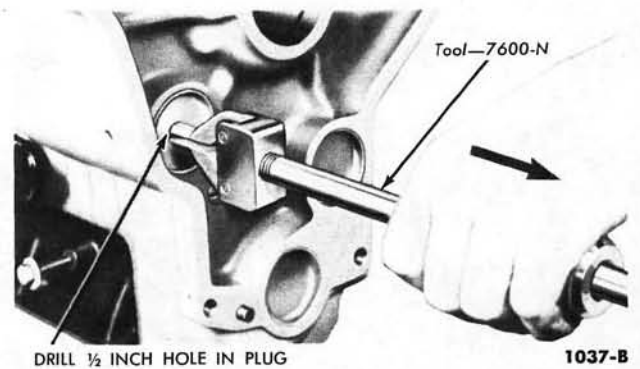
Camshaft Rear Bearing Bore Plug Removal
